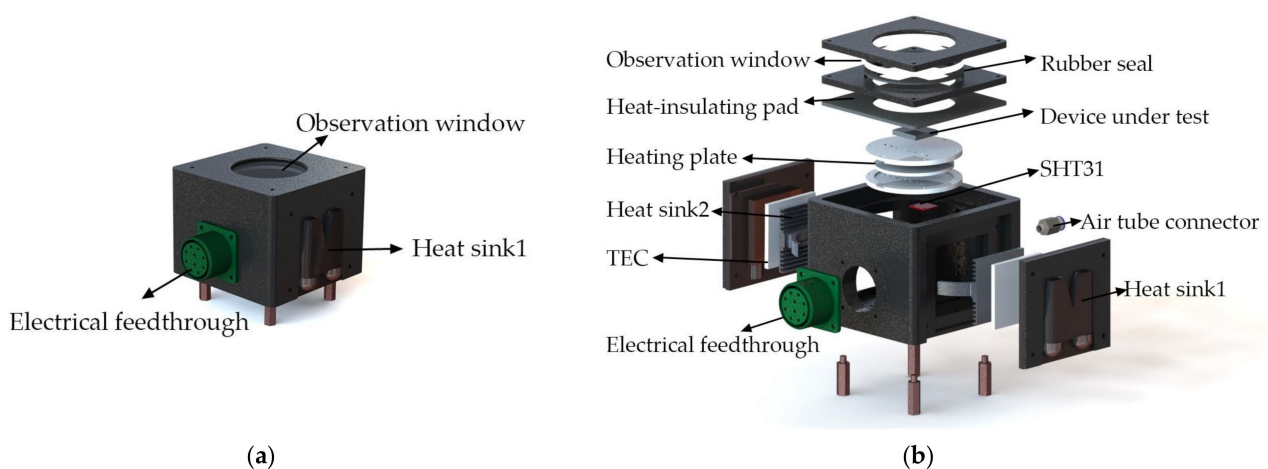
(a) Schematic illustration of the assembled test chamber, (b) schematic illustration of the exploded structure of the test chamber.
